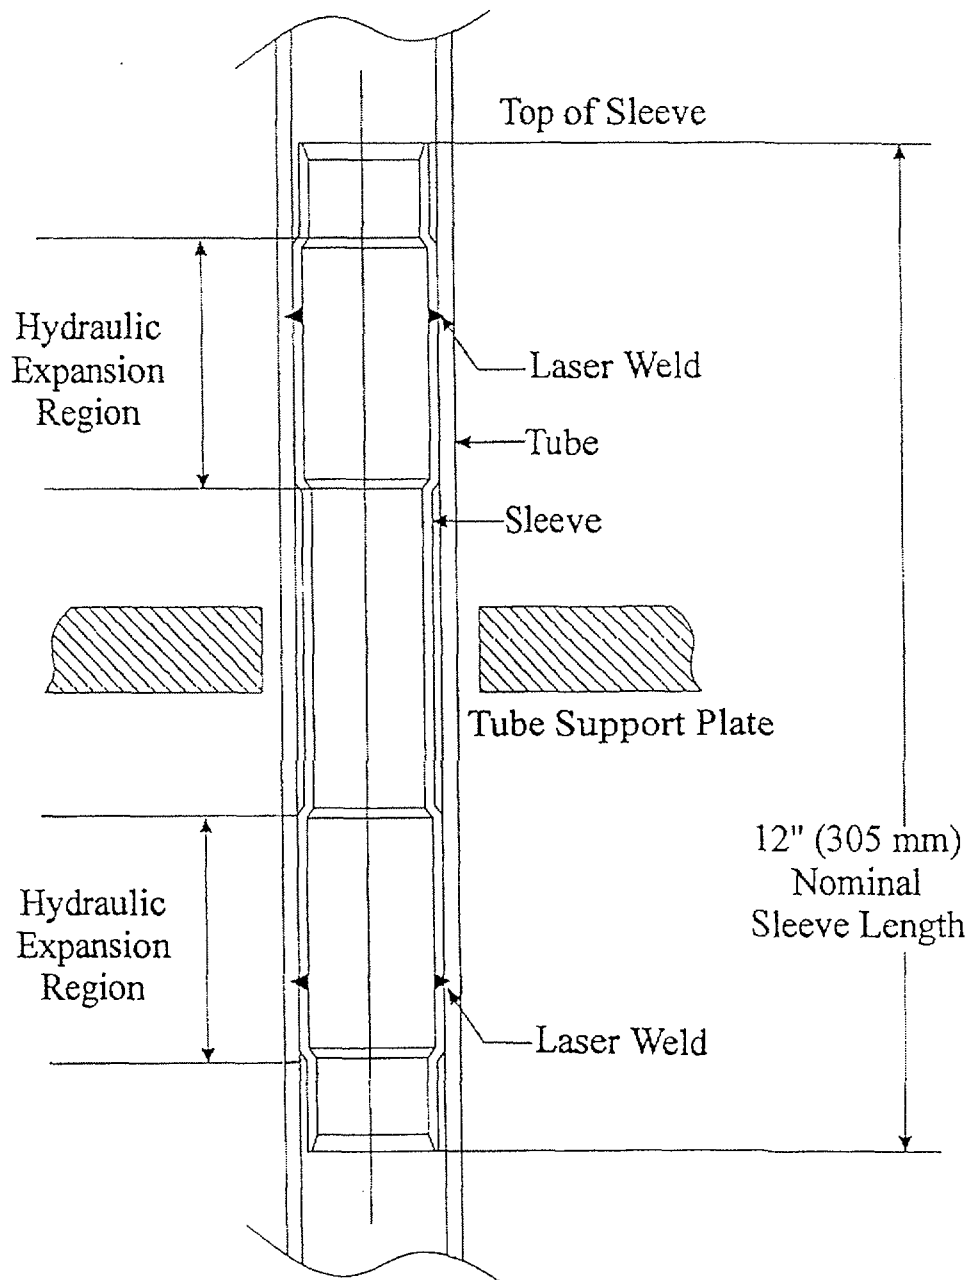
Westinghouse Laser Welded Tube Support Plate Sleeve Installation.
